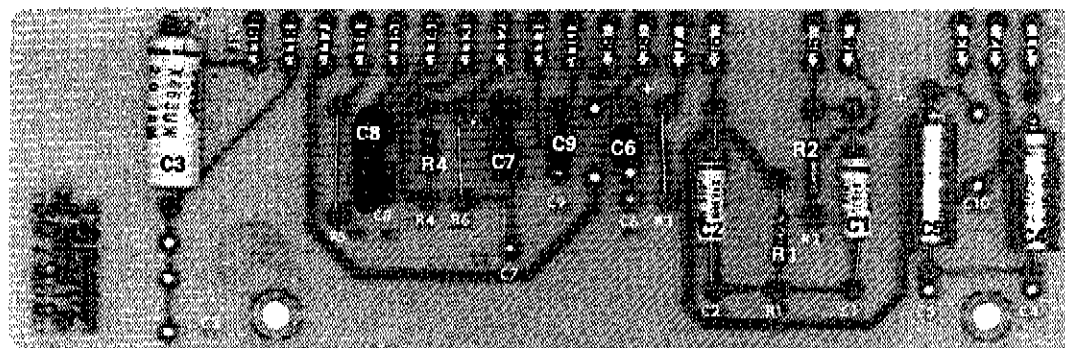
PCB ASSEMBLY, 1000 Hz (-05 Option)
